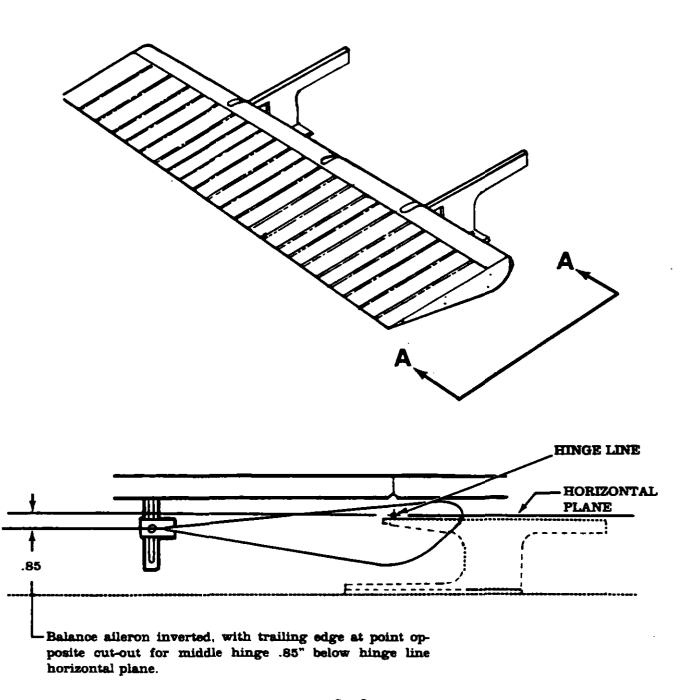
Control Surface Balancing (Sheet 3 of 5)
